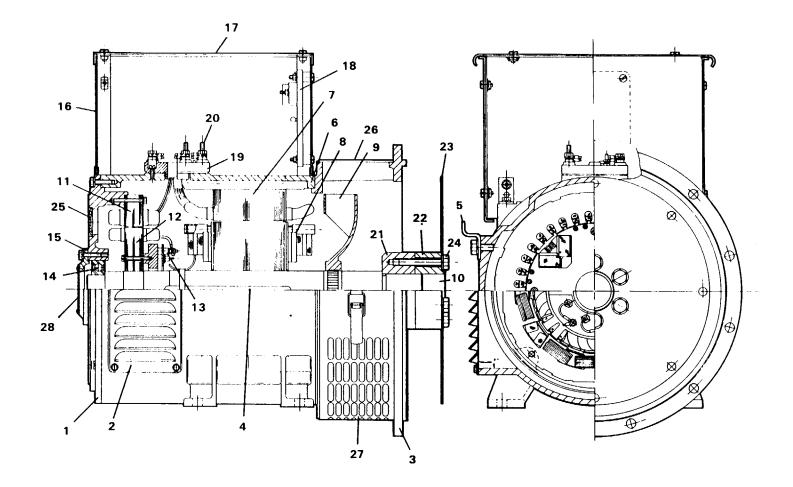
PC1 SINGLE BEARING MACHINE (INBOARD - EXCITER)
